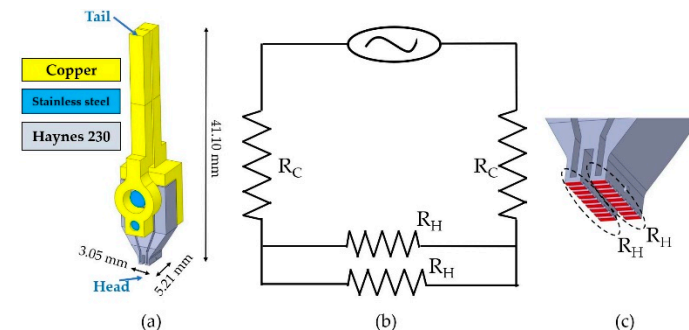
A parallel welding tip for (a) overview, (b) electric flow direction, and (c) enlarge head.
